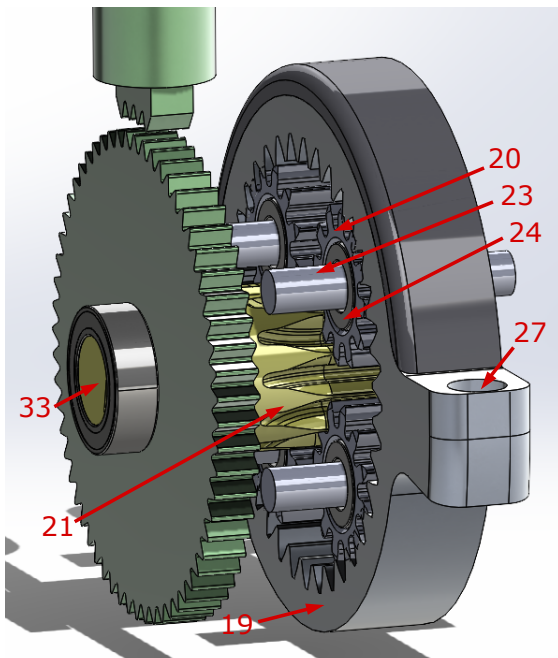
Lateral view focused on the locking device and the epicyclic gearbox. (19) Ring gear, (20) Planet gear, (21) Sun gear, (23) Planet shaft, (24) Planet bearing, (27) Hole in the ring for the nylon rope, (33) Sun shaft.
